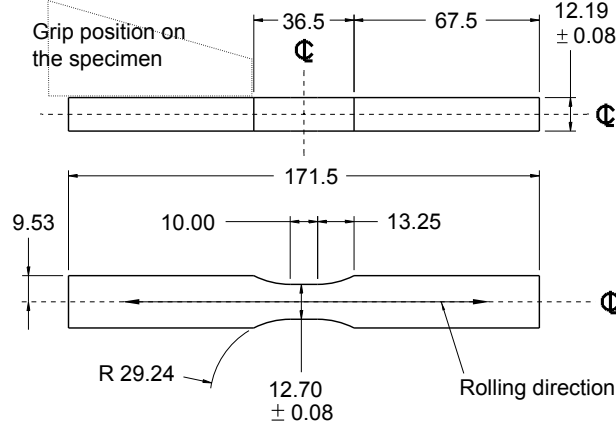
AA-2024-T351 cyclic test sample geometry (dimensions in mm). Position of the hydraulic grip on the specimen is also shown.
